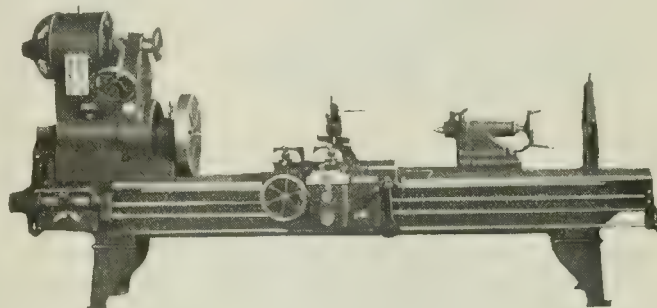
HEAVY-DUTY LATHE EQUIPPED WITH MOTOR LIKE THAT IN L, FIG. 3
